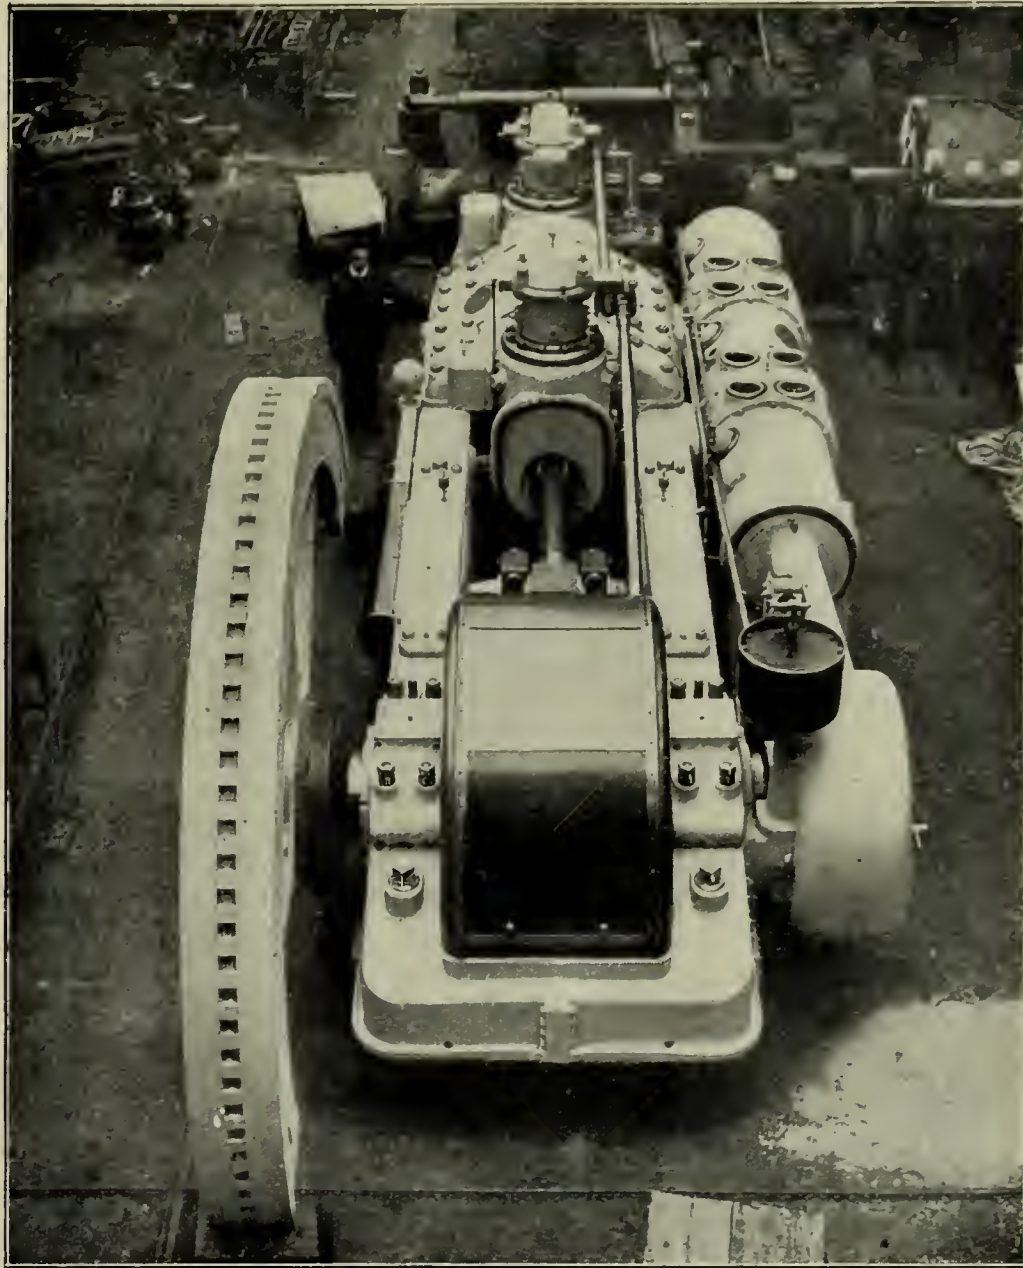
600-B.H.P. SINGLE-CYLINDER TWO-CYCLE KÖRTING GAS ENGINE.
